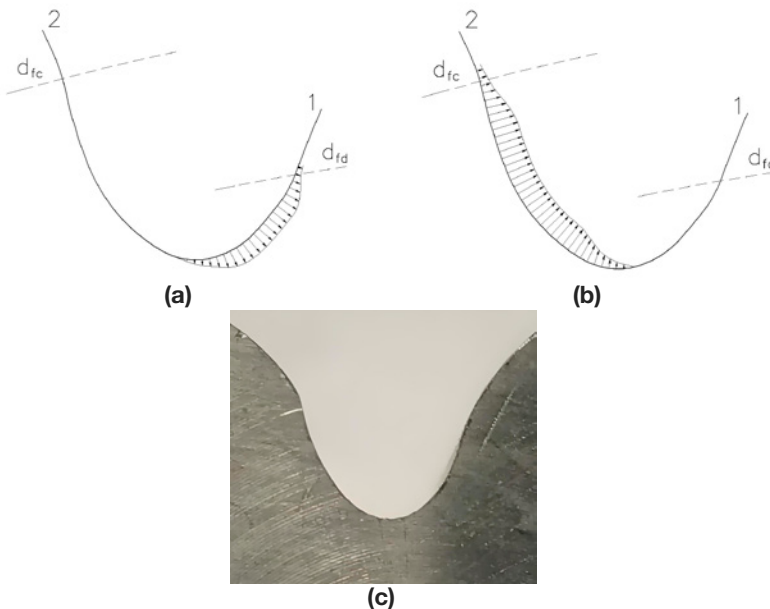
Asymmetric tooth root profile optimization; (a) and (b)—tensile and compressive root bending stress charts along the optimized root profile; 1—drive involute flank, 2—coast involute flank; (c)—photo of optimized tooth root profile.
